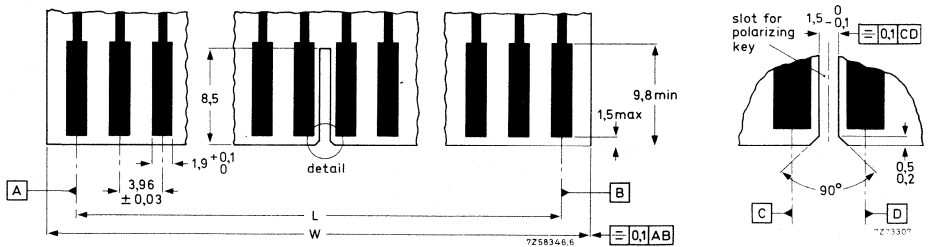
Recommended dimensions of the printed-wiring board; see Table 6 for dimensions L and W.
